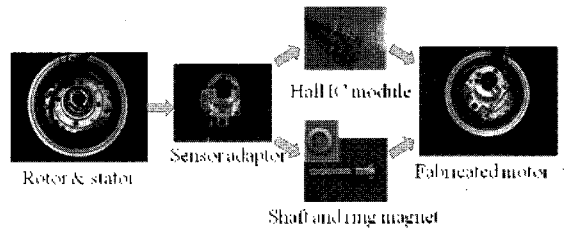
Construction of motor assembly using hall IC module attached to the stator
